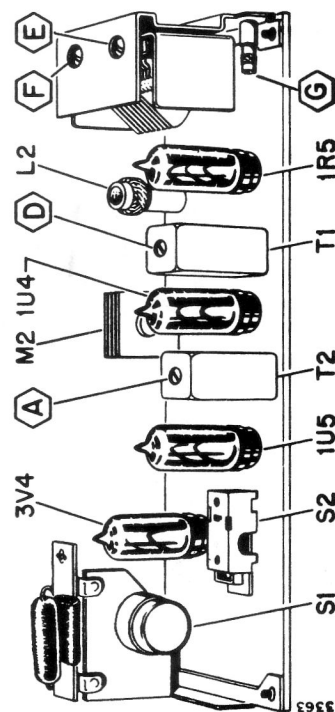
Top View of Chassis 200X. Tube Locations and Alignment Points Shown.
